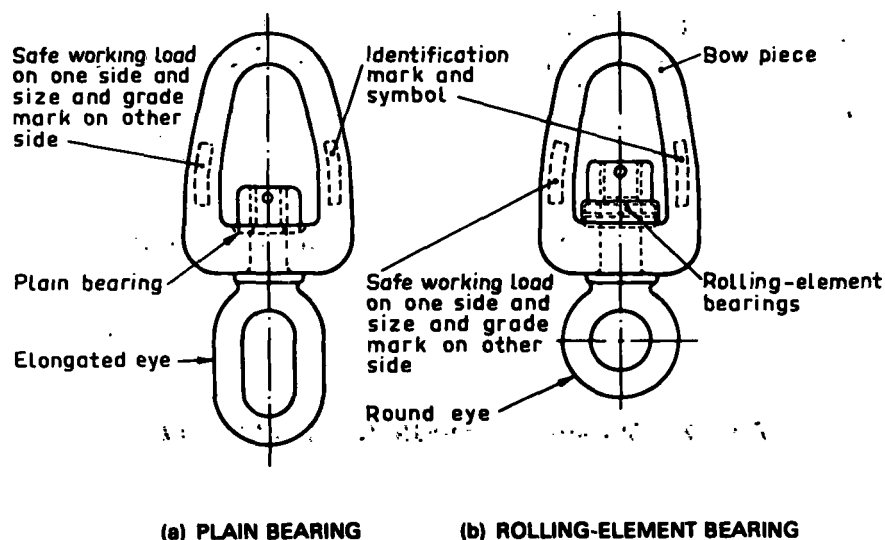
TYPICAL SWIVEL ASSEMBLIES
